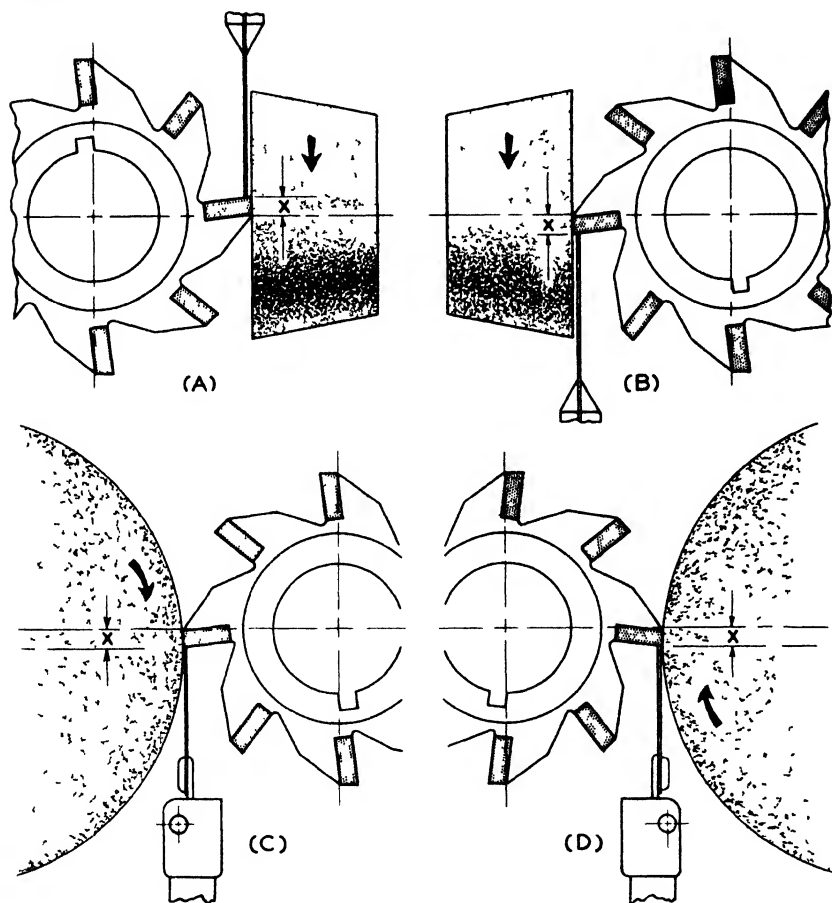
The Direction of Grinding Wheel Rotation in Relation to the Cutting Edge of the Tool Is Extremely Important
